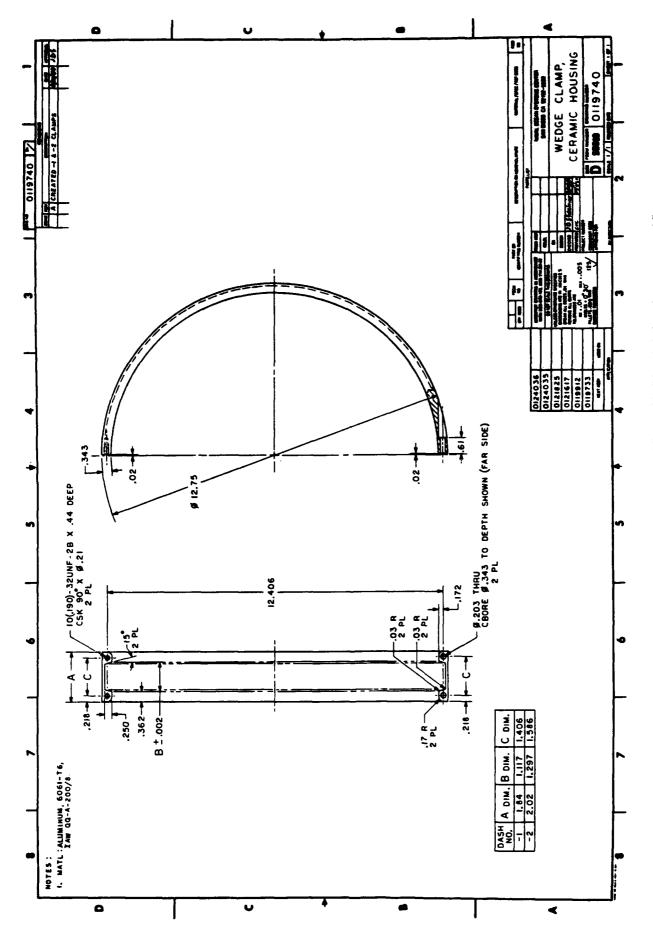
Wedge clamp for coupling cylinder assemblies and bulkheads in housing test assemblies.
